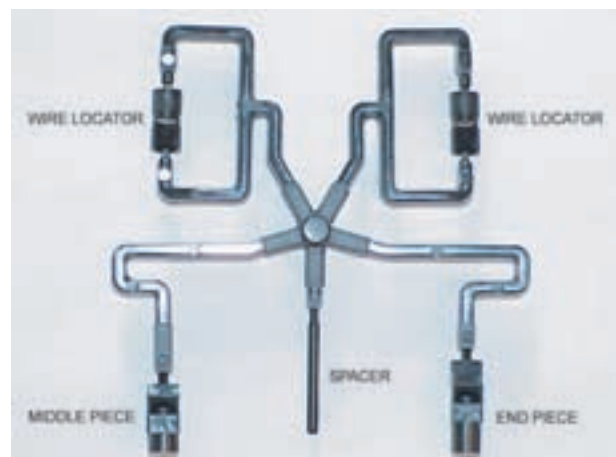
Injection molding prototype of two wire locators (black cylinders at top left and right), one end- and one middle-block (black cylinders at bottom left and right), produced with a four-fold injection mould at Philips CFT. Still visible is the plastic frame that holds the various parts together during the production process.
